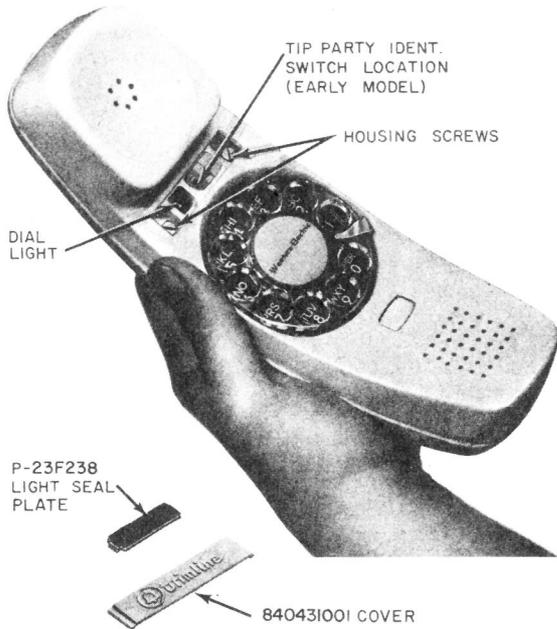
220A Hand Telephone Set Cover and Light Seal Removed
